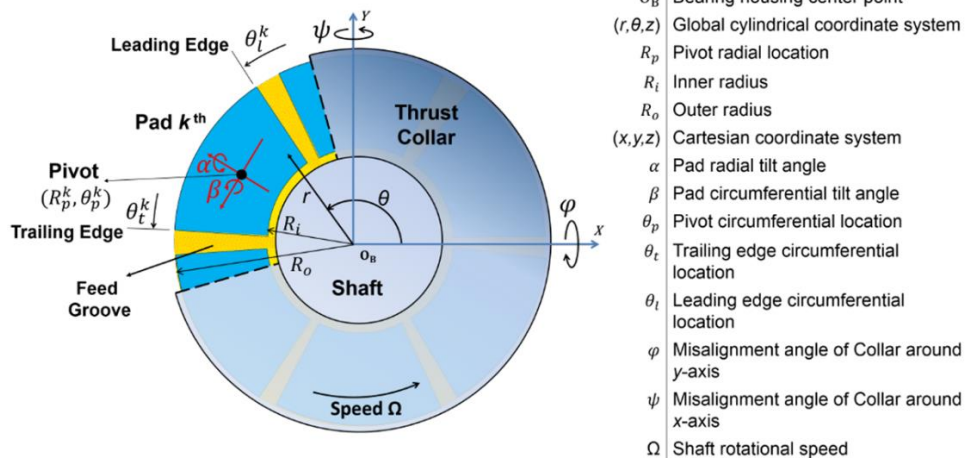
Geometry and coordinate system for a tilting pad thrust bearing [2]
